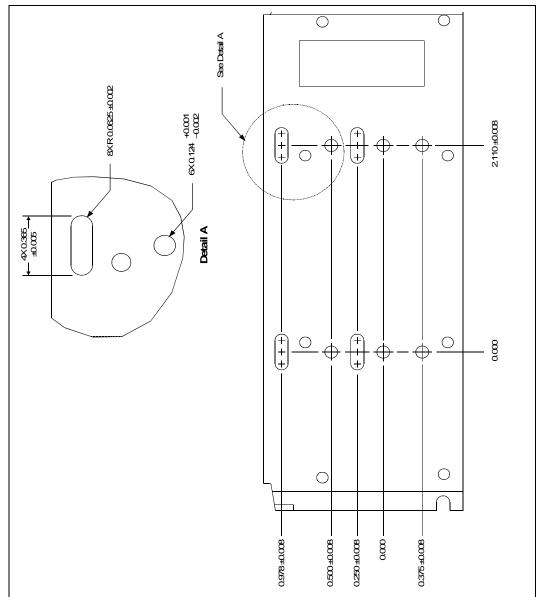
S.E.C.C. Packaged Processor — Extended Thermal Plate Attachment Detail Dimensions
